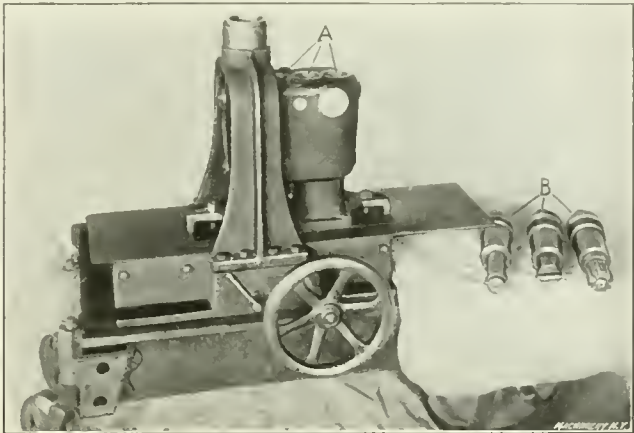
Indexing Jig for Boring and Reaming the Four Valve Cage Holes
